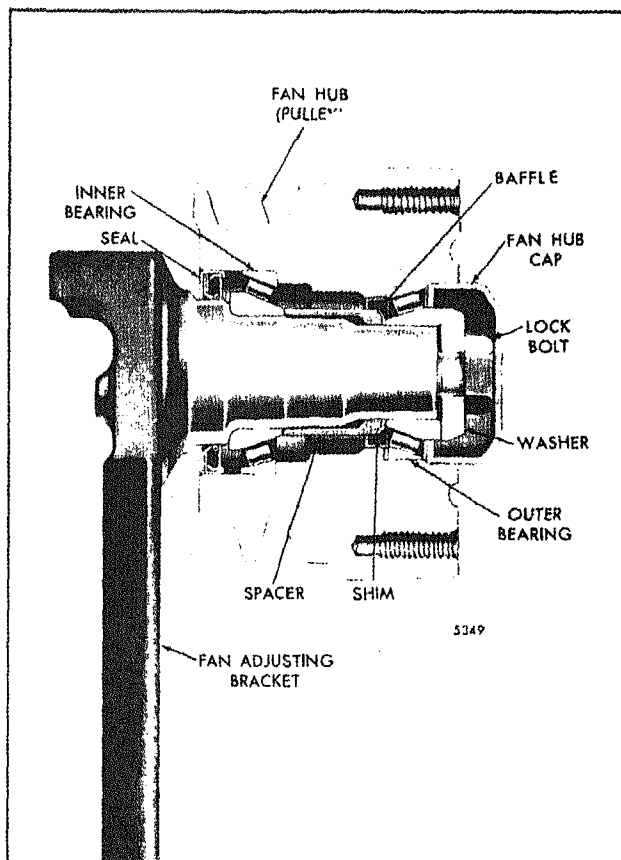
Current Fan Hub Assembly (In-Line Engine)
